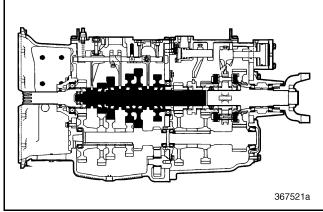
Front Mainshaft Component Locator (T313L21/T318L21 Shown)
